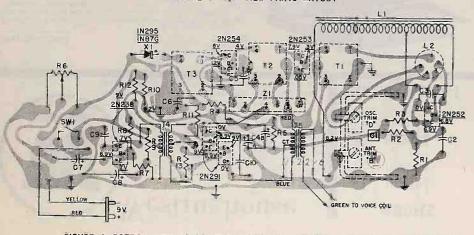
BOTTOM VIEW OF PRINTED BOARD SHOWING TOP COMPONENTS SYMBOLICALLY
